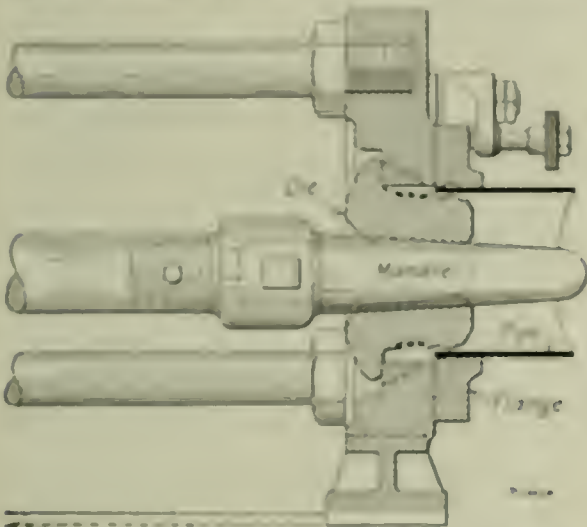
PORTION OF FLANGING MACHINE, SHOWING FLANGE AND PIPE IN PLACE
